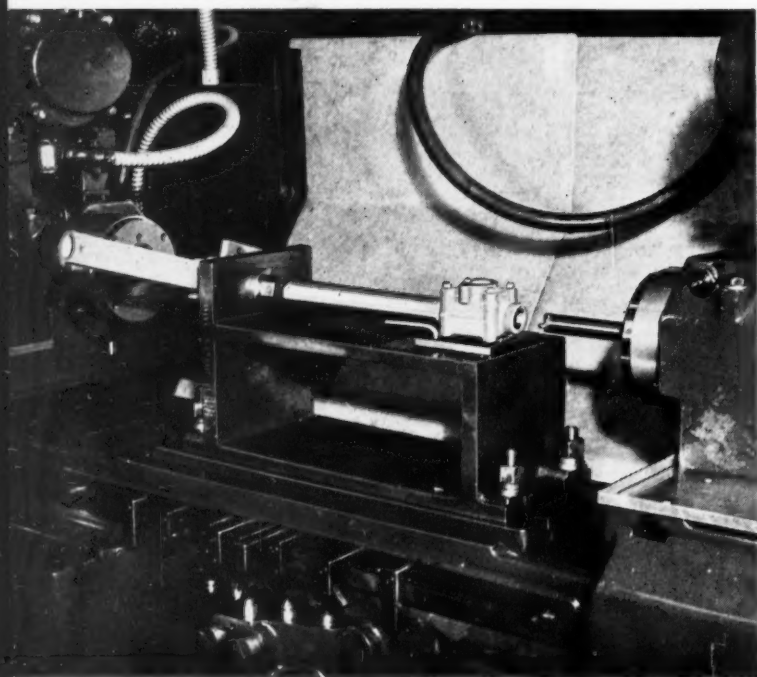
Producing Prototype Landing Gear Struts from Forged Duralumin Billets on a Keller Automatic Tool-room Machine
